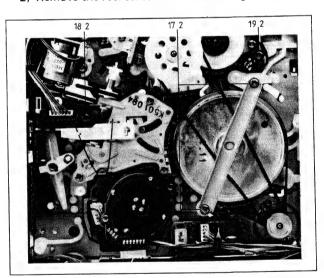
Capstan Flywheel, Mechanism State Switch Reel Sensor
